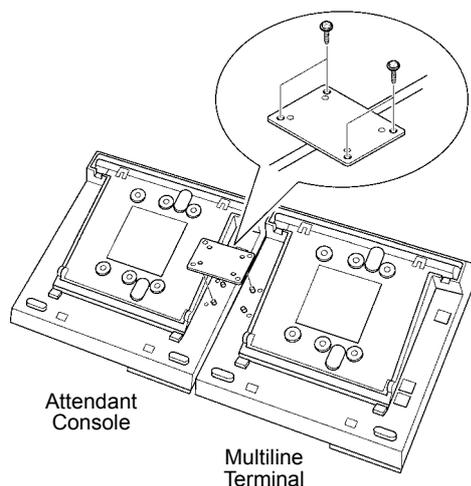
Connecting an Attendant Console to a Multiline Terminal
